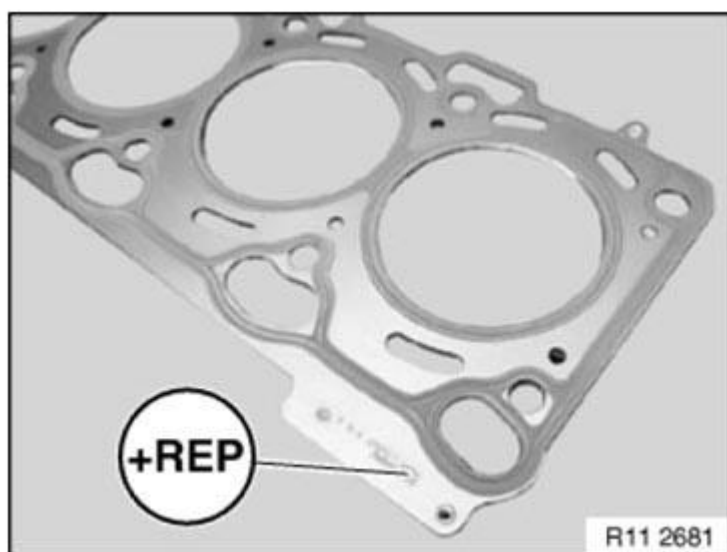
Identifying Cylinder Head Gasket (+REP)
